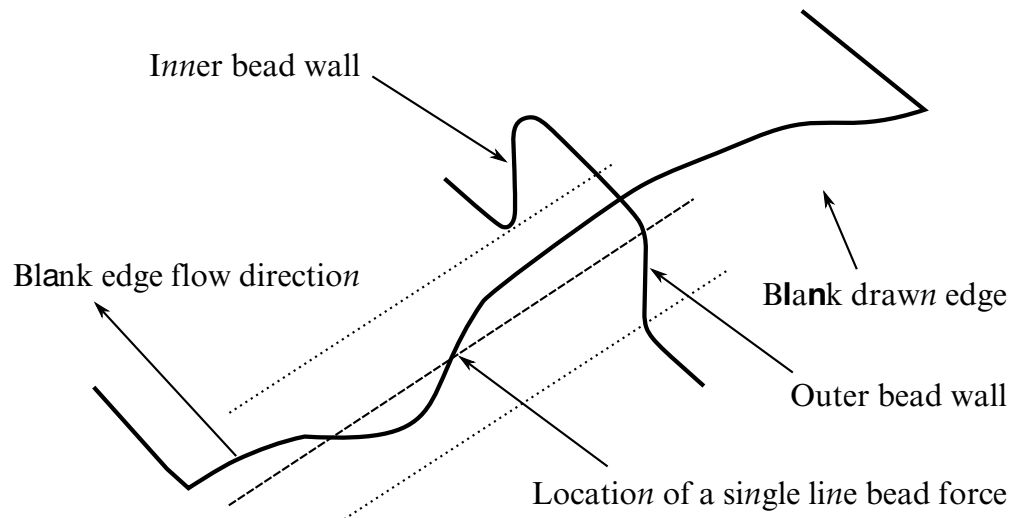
A possible scenario of sheet blank edge draw-in condition
